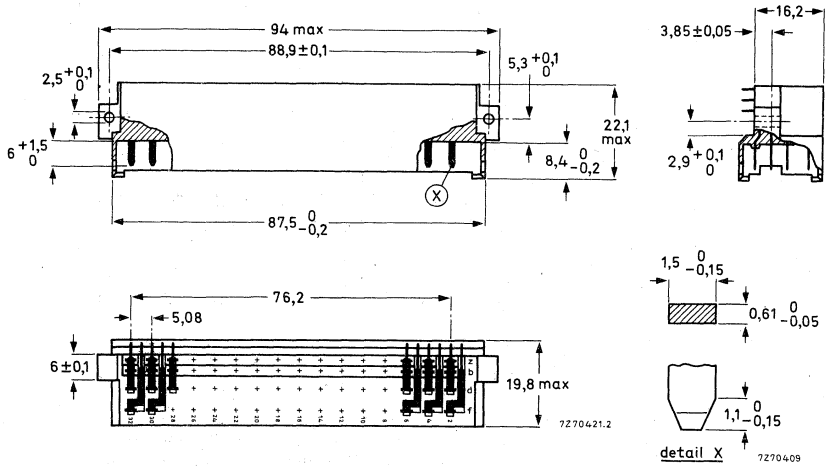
Male part with 90° angled dip-solder pins. The pitch between the pins of rows z and f is 2,54 mm instead of 5,08 mm.
